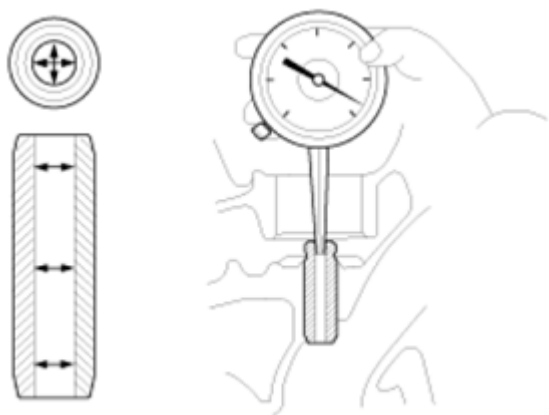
Measuring Valve Guide Inside Diameter Using Caliper Gauge
